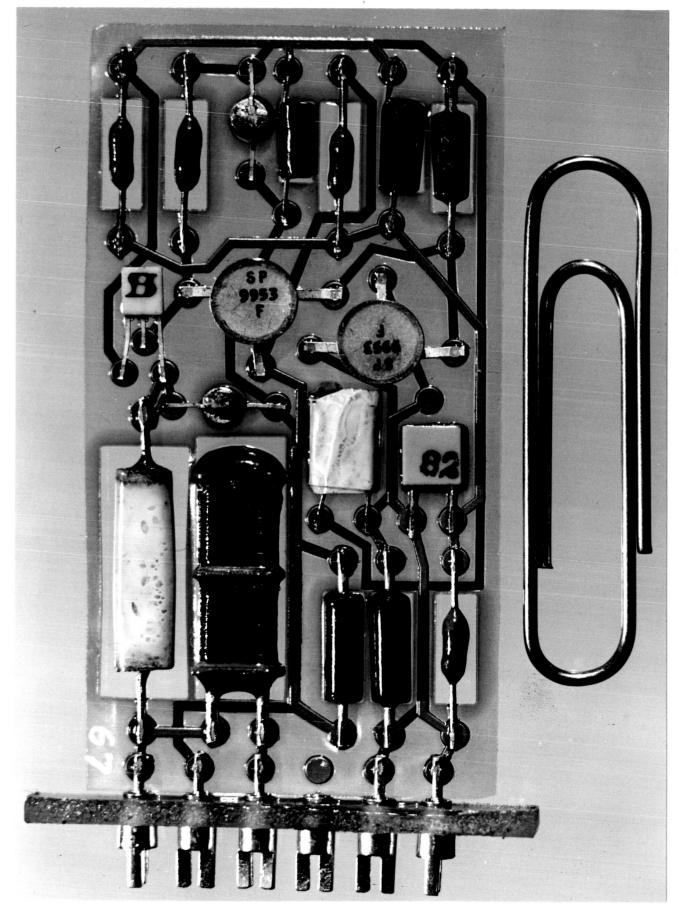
Component Layout Conforming to GD/E Drawing 3005603, Revised 21 April 1965
